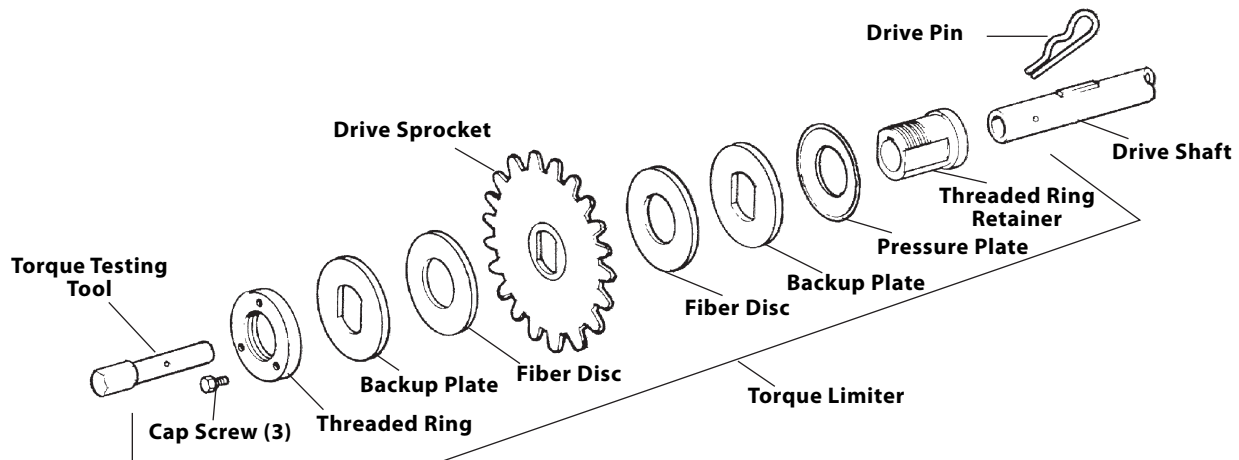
Torque Limiter, Torque Testing Tool, Drive Sprocket and Drive Shaft
